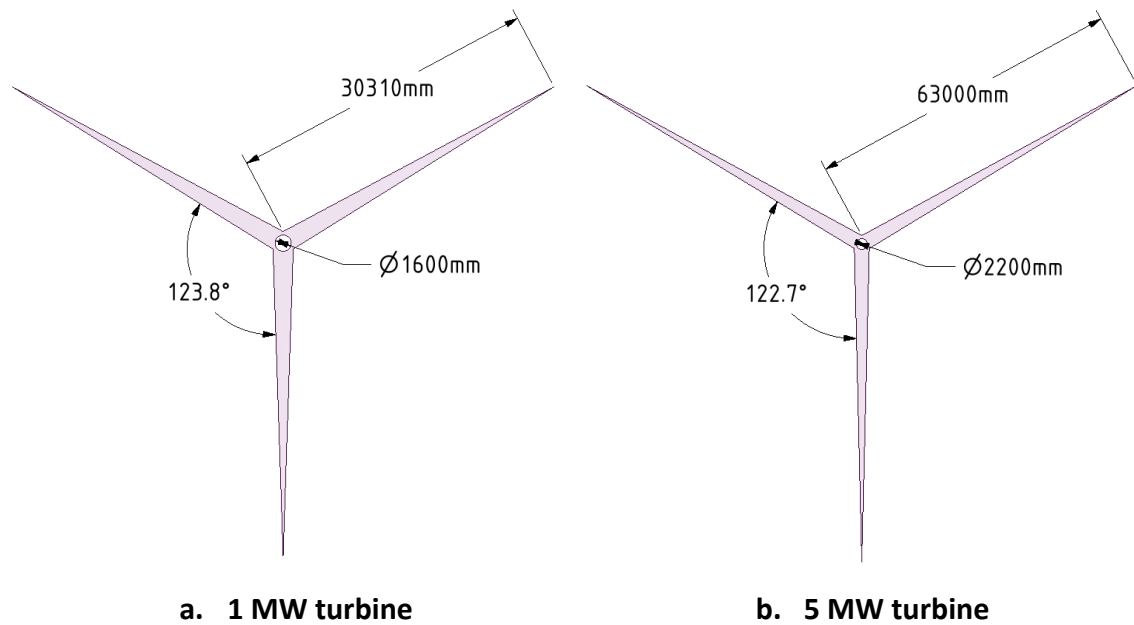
Blade dimensions for the 1 MW and 5 MW wind turbines
